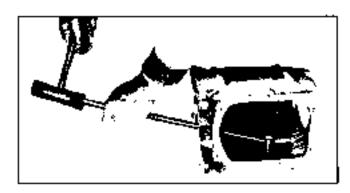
C-9 Removing Reverse Idler Gear Shaft
